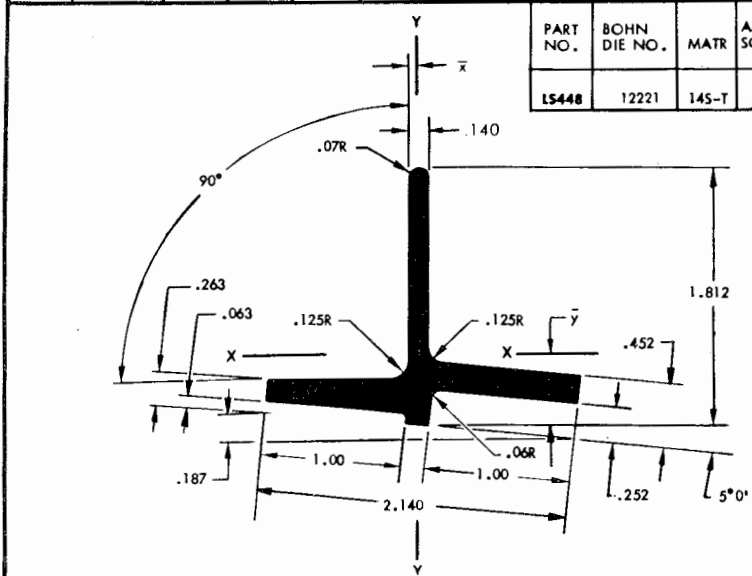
(Sheet 3 of 17 Sheets) — Extruded Standards
